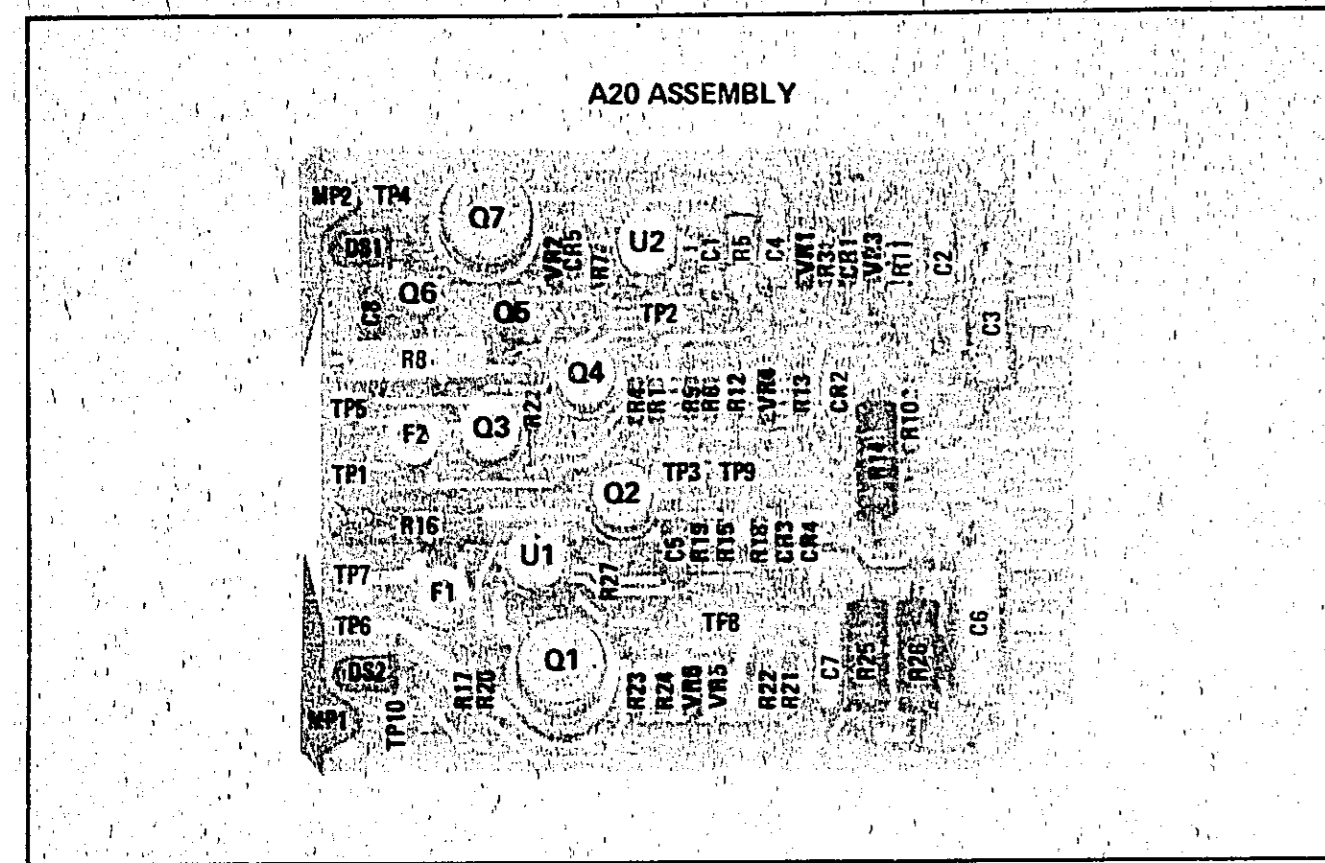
A20 +5.2V and +44.6V Regulator Assembly Component Locations
